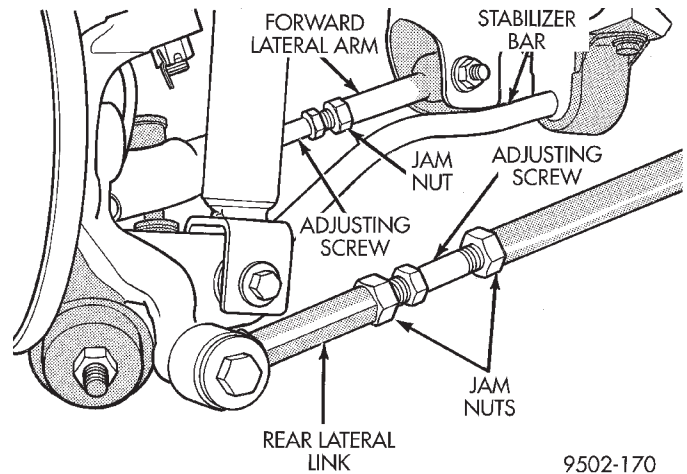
Lateral Arm Adjusting Screw Jam Nuts
